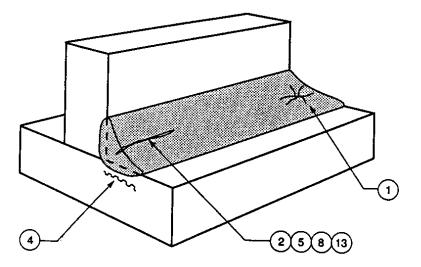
Fillet Weld with Incomplete Penetration to the Root
